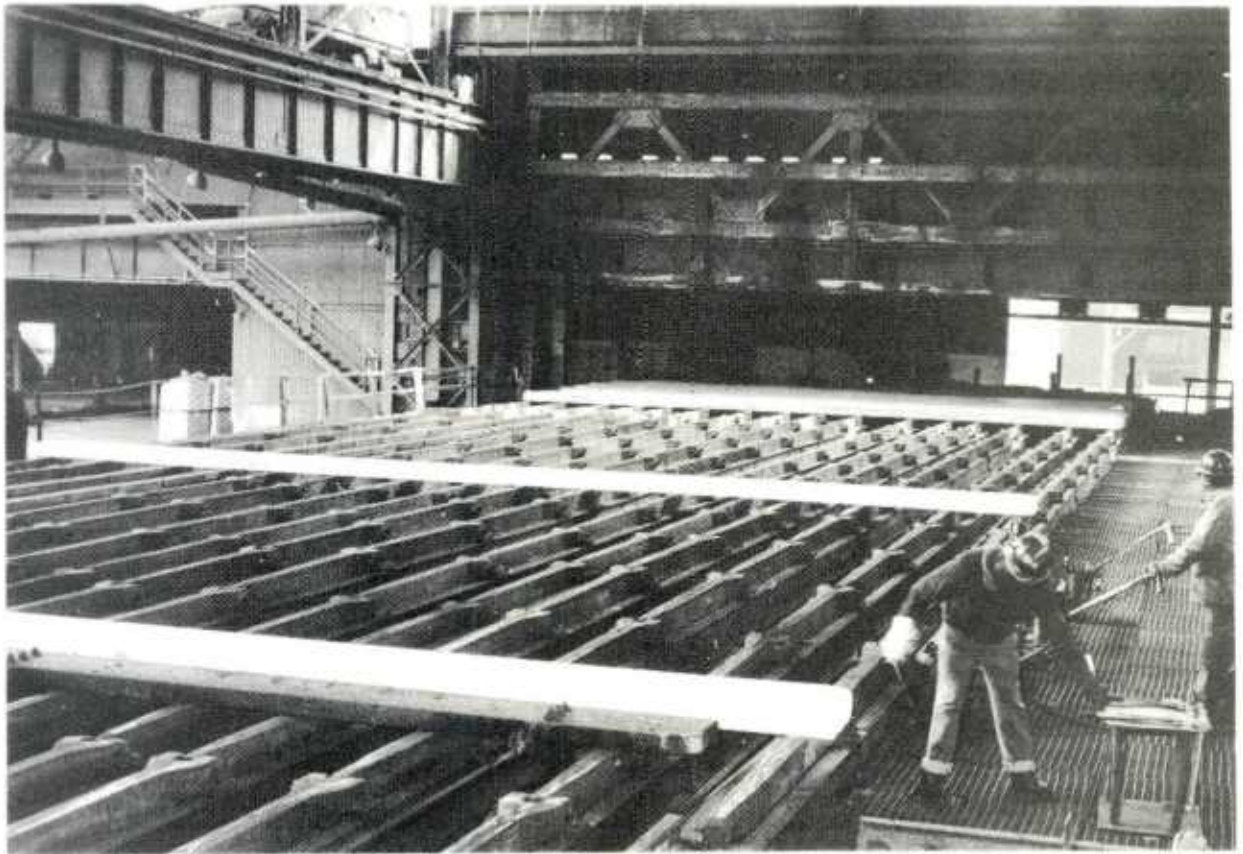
21 inch Cooling Bed Which Air Cools Billets Prior to Final Slow Cool in Either Bung Furnace or Cooling Boxes
